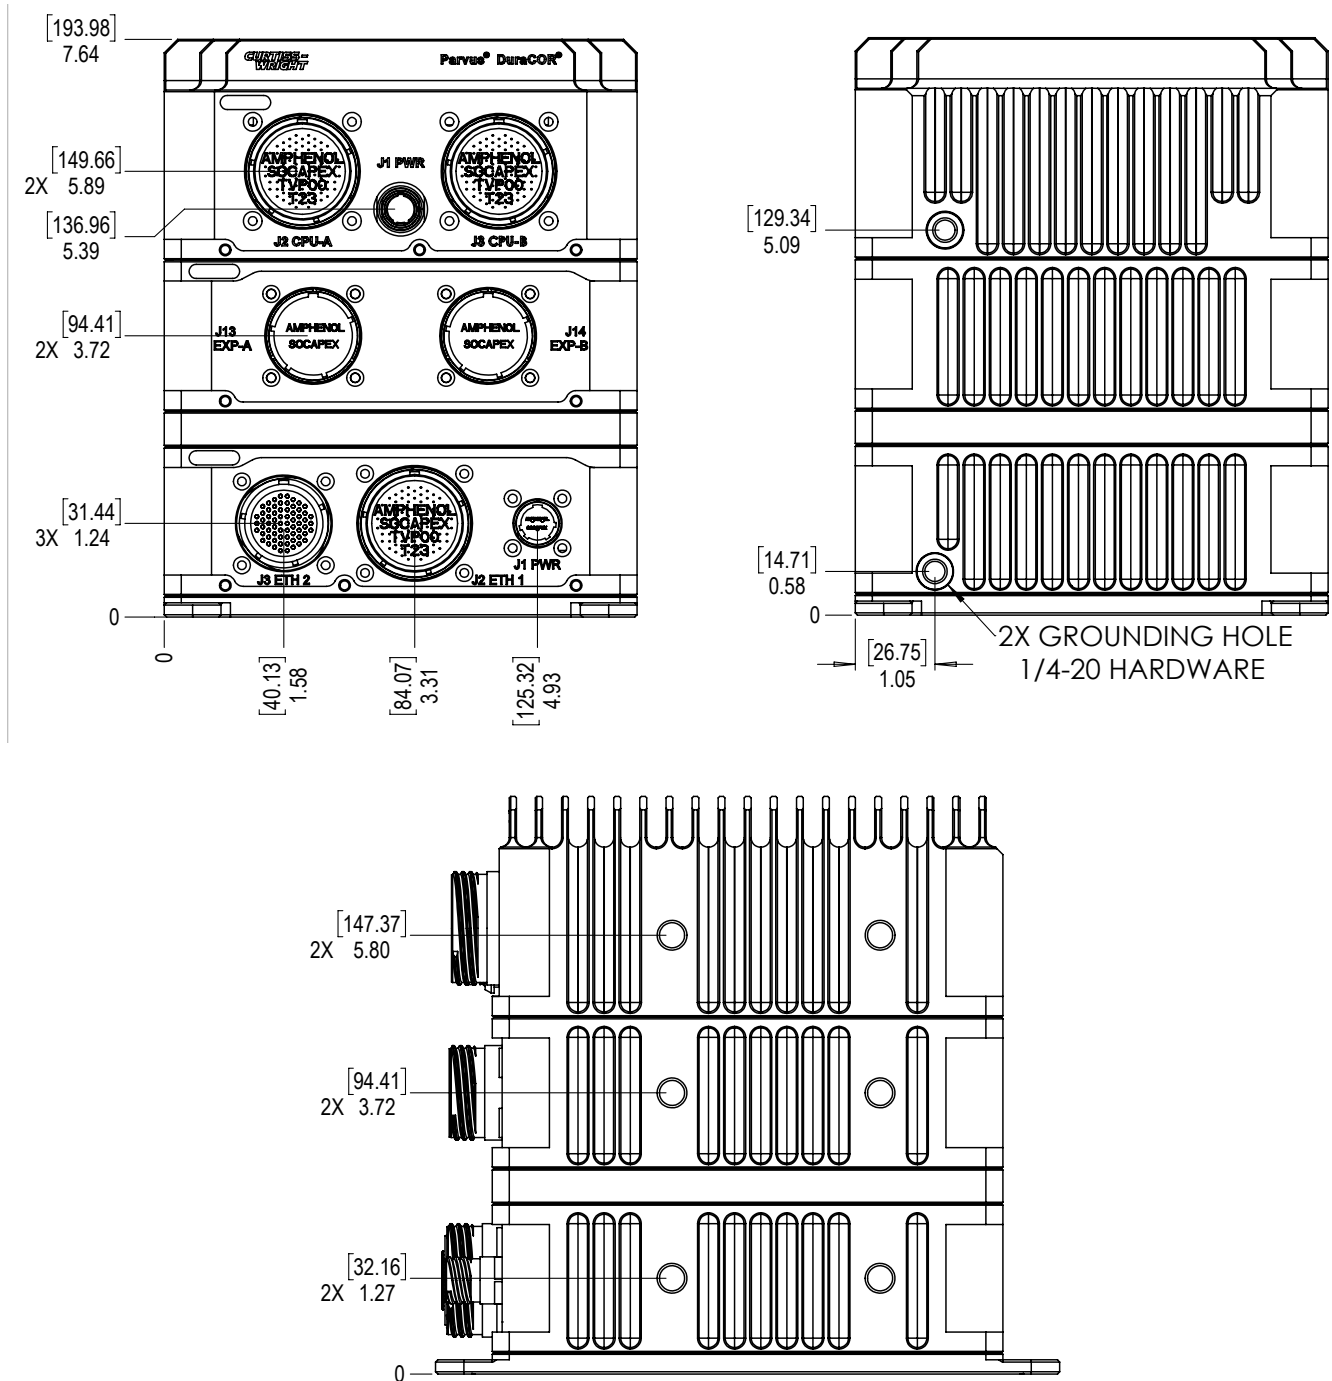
DuraCOR 8042 MCOTS unit dimensional line drawings (measurements shown are in inches and [cm])
